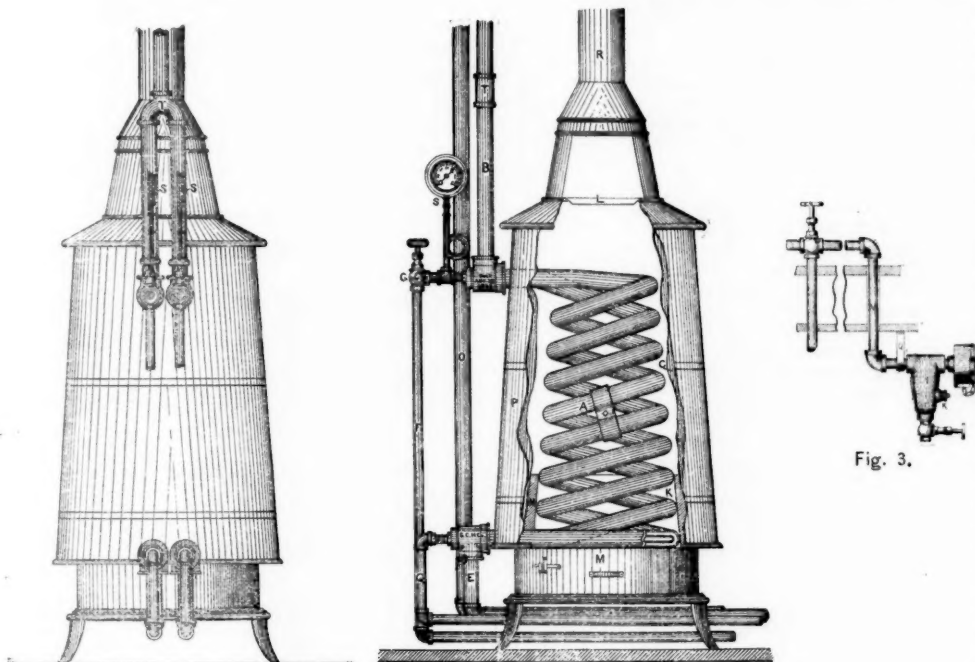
The Gold Compound Double Coil and Baker Stove.
